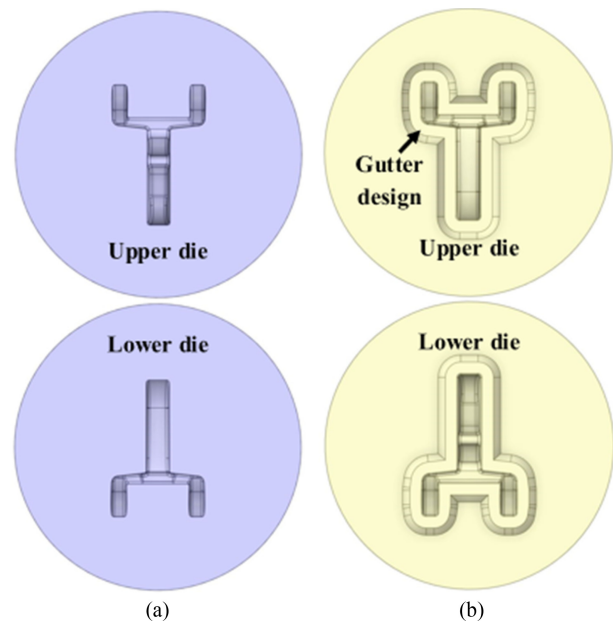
Forging die design: (a) 1st forging die and (b) 2nd and 3rd forging die
